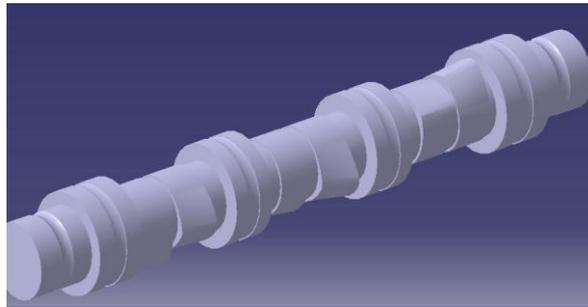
MODIFIED Iso-metric view of CAM SHAFT.
